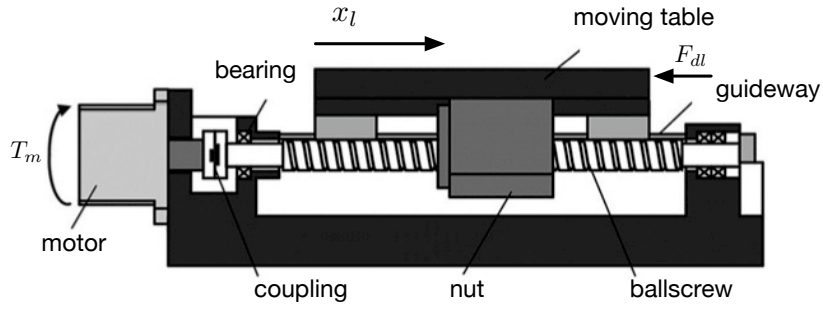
Schematic diagram of a ball screw feed-drive assembly [12].
